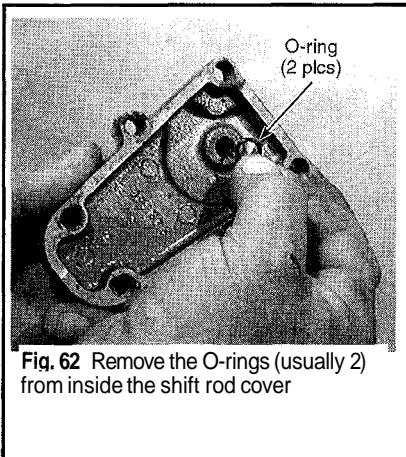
Remove the O-rings (usually 2) from inside the shift rod cover
